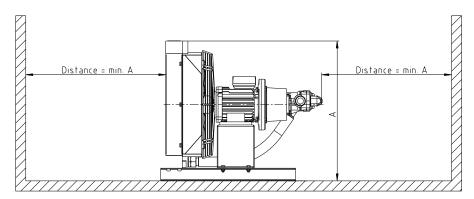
Oil/air cooler; example: OPC200 to OPC400
